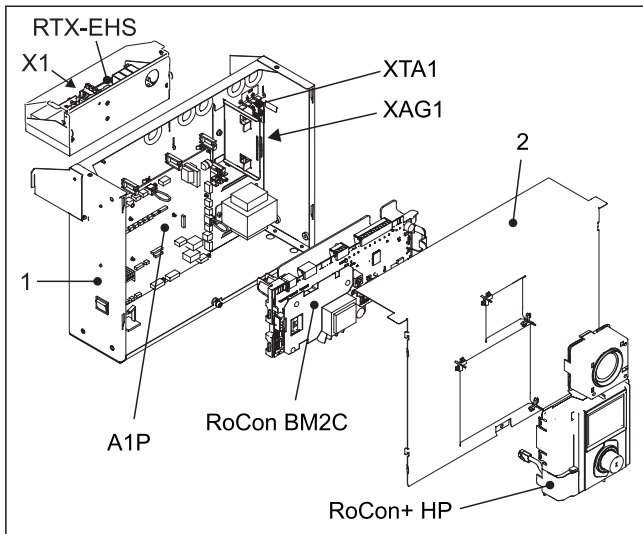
Position of the printed circuit boards and terminal strips (for the legend, see Chap. 9.3)
